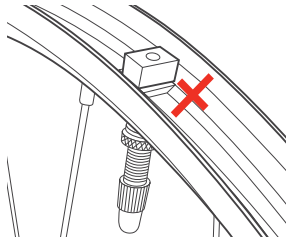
Place the TubeLess Ready valve through the rim strip and the rim.
